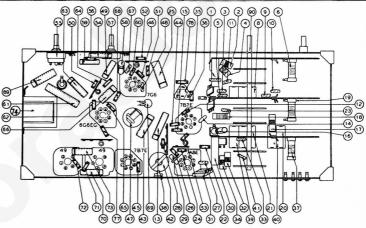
LOCATIONS OF PARTS-UNDER CHASSIS, Model 42-762
